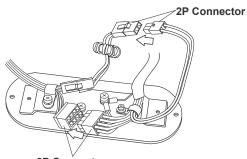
B Attaching Balance Arm Cable on Bottom Cover
